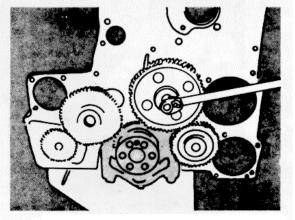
N-20. Tighten the Idler Gear Retainer Capscrews
